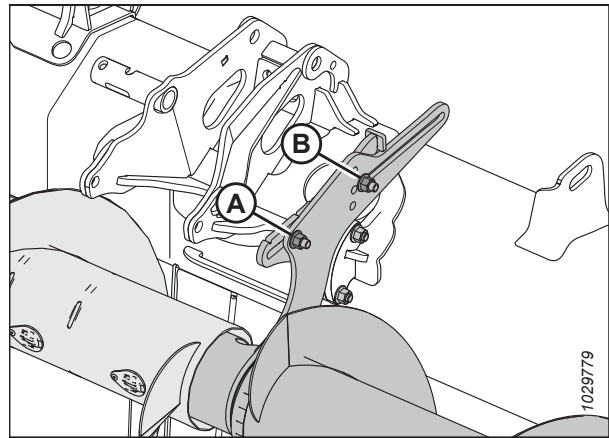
Initial Position of Adjustable Mounts – Three-Piece Auger
